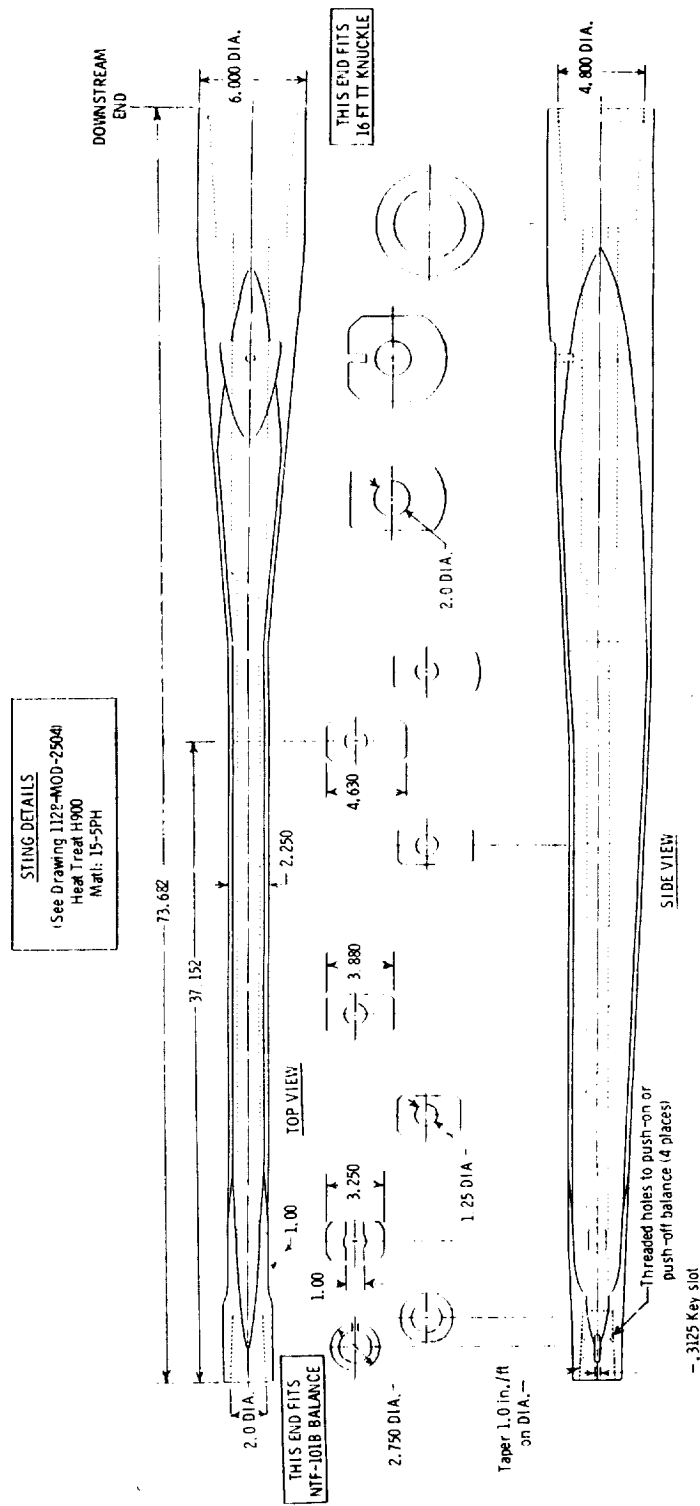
Sketch of sting 1128-MOD-2504 (Grumman). (All dimensions are in inches.)
